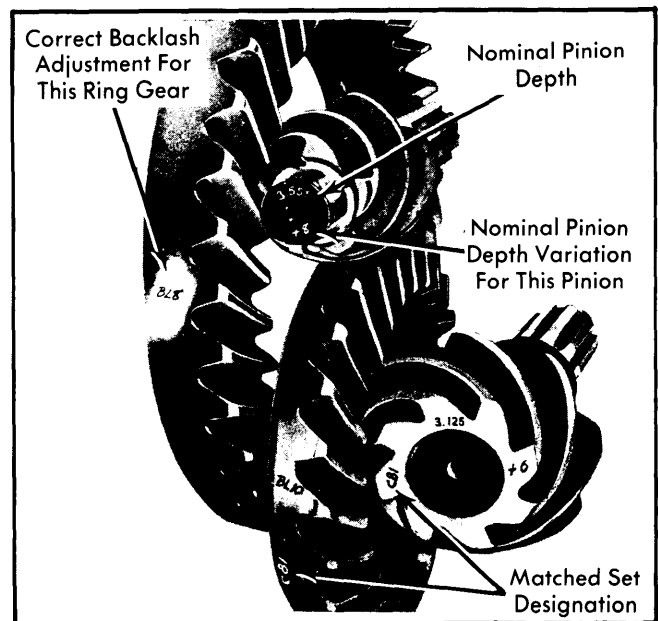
Drive Pinion and Ring Gear Marking Codes
